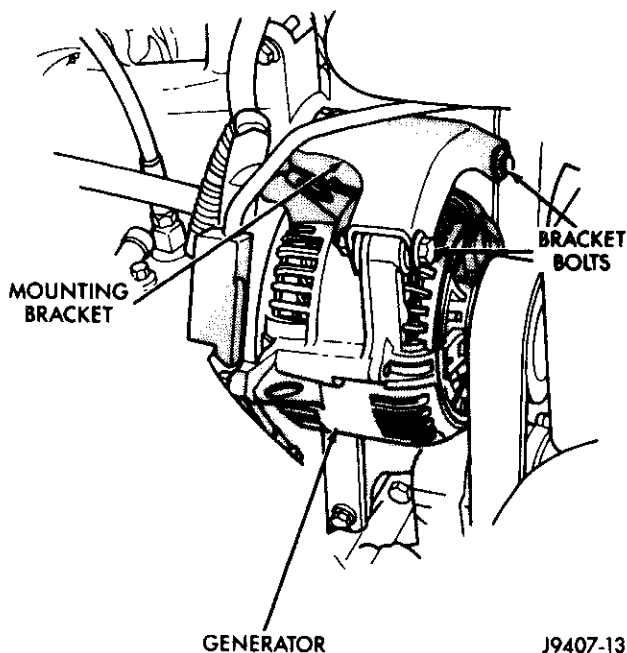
Generator Mounting Bracket Bolts—Diesel
